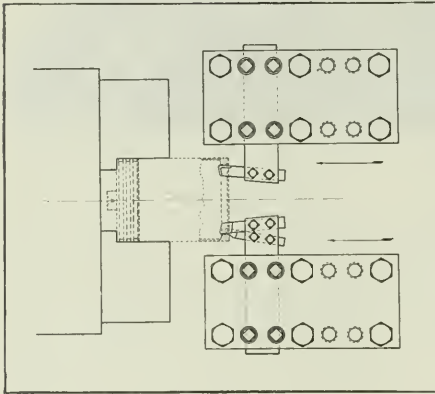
Rough- and finish-boring and chamfering the Skirt of the Piston
